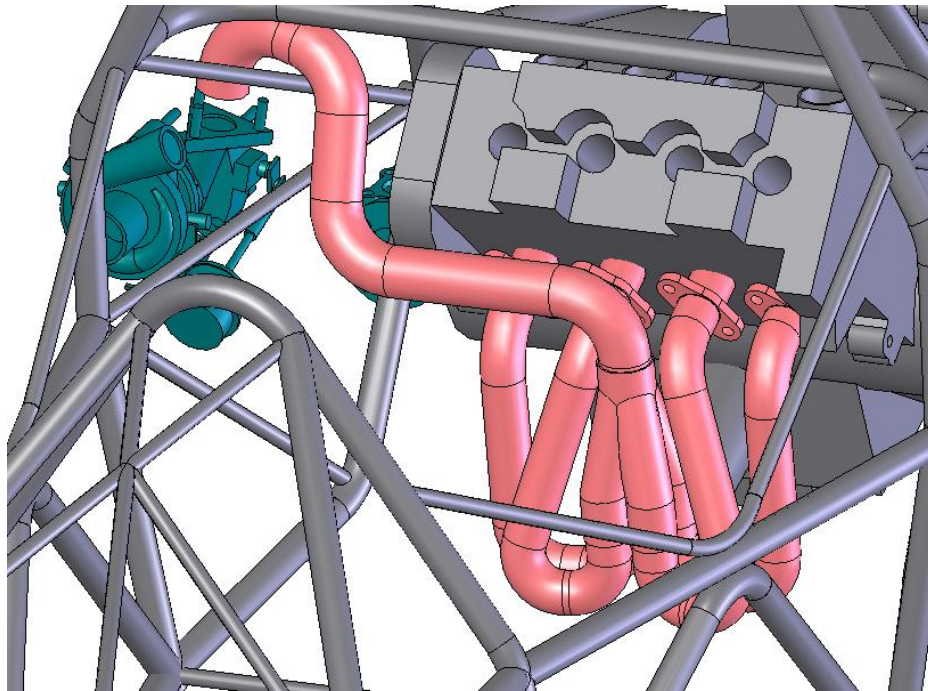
Turbocharger feed pipe added. (Modeled by D. Curran, engine/chassis by FSAE team)
